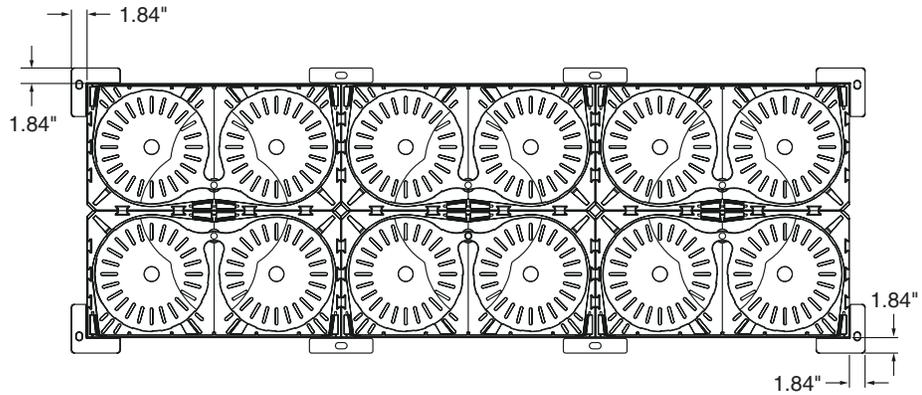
Floor Layout - Seismic Applications - No Spill Containment
